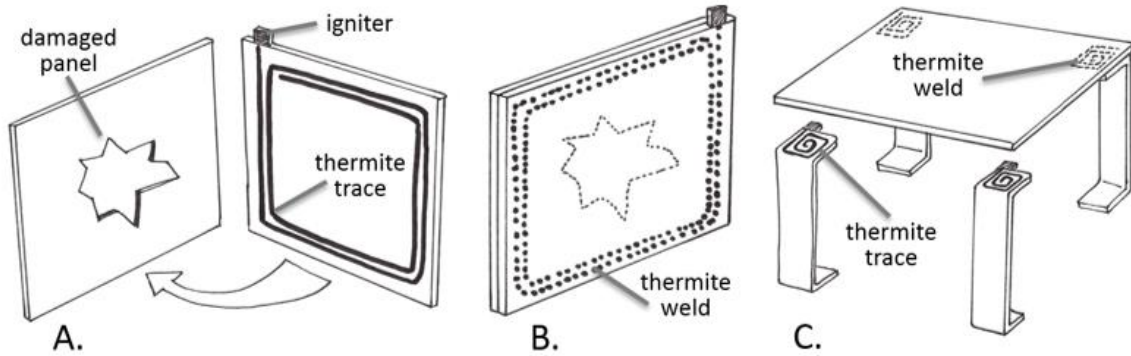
A) and B) A pre-printed thermite trace is used to rapidly repair a damaged panel. C) Pre-printed thermite traces assisting in rapid assembly.
